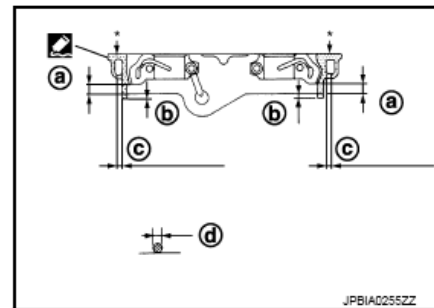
Identifying Liquid Gasket Application Areas On Mating Surface Of Camshaft Bracket
